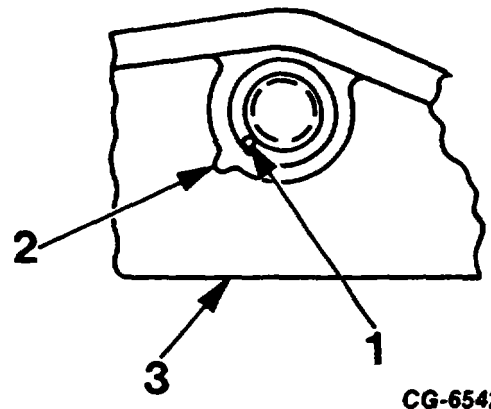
Installation of Oil Pump and Tachometer Drive Shaft Bearing in Crankcase
